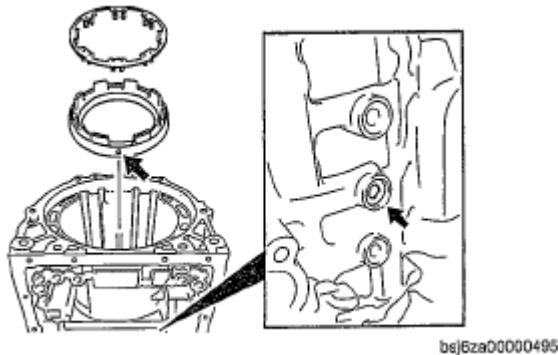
Positions For Installing B1 Brake Piston Component And Return Spring
